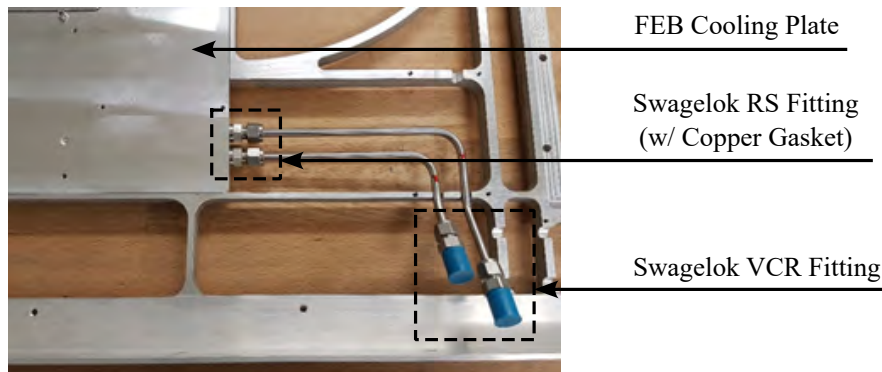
FEB cooling plate assembled with metal-to-metal seal connectors (figure from J. Thaufelder (GSI, Darmstadt)).
